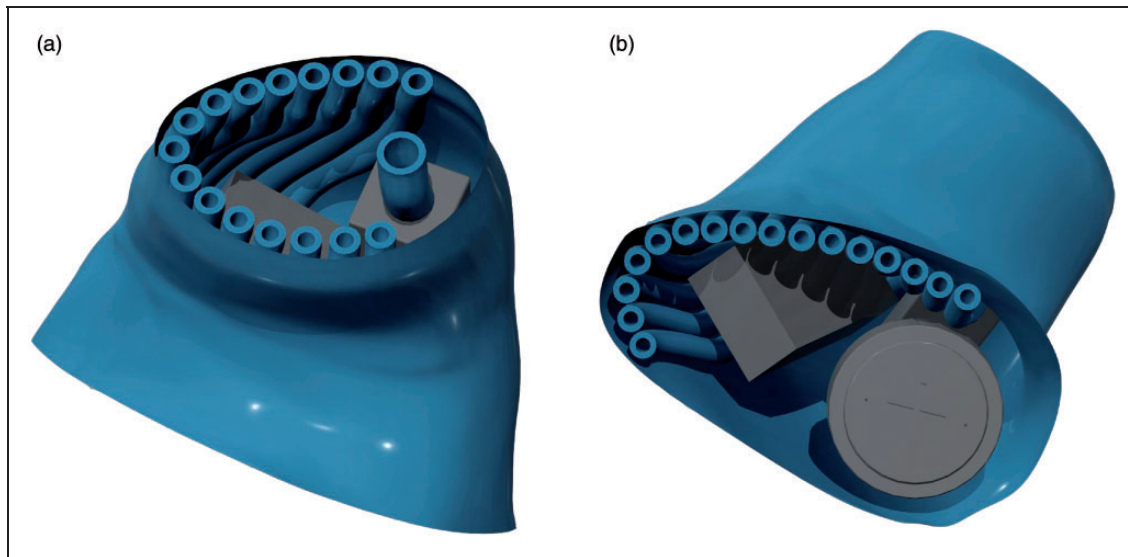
Views of the (a) top and (b) bottom of the hearing aid model A with the base and end plates removed.
